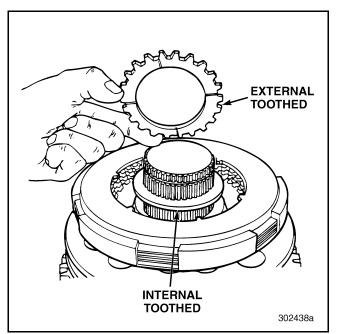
Removing External-Toothed Thrust Washer (T313L21/T318L21 Shown)
